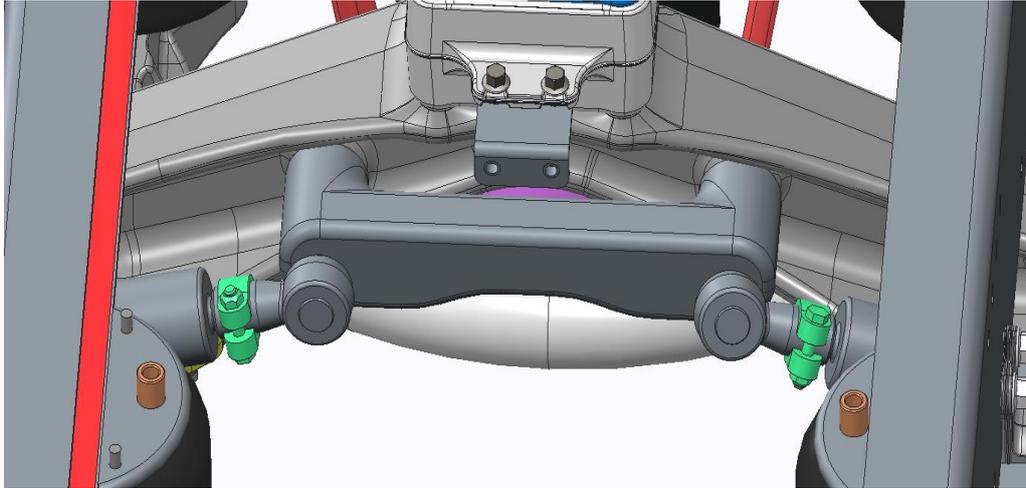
Redesigned steering cylinder adapter, mounted on the tag axle.
